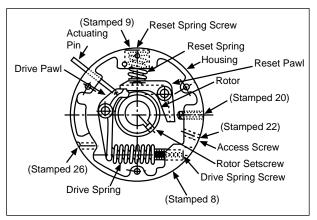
CLUTCH INTERNAL COMPONENTS
